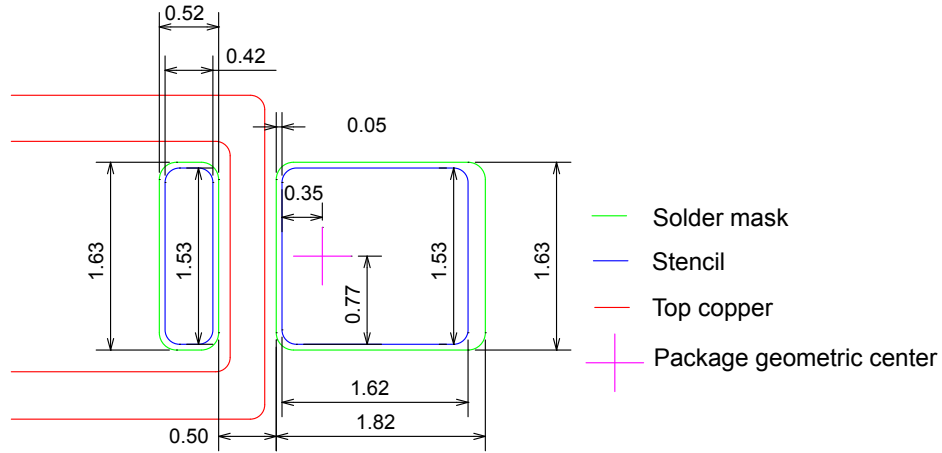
Recommended PCB solder pad layout for LUXEON 3020.
